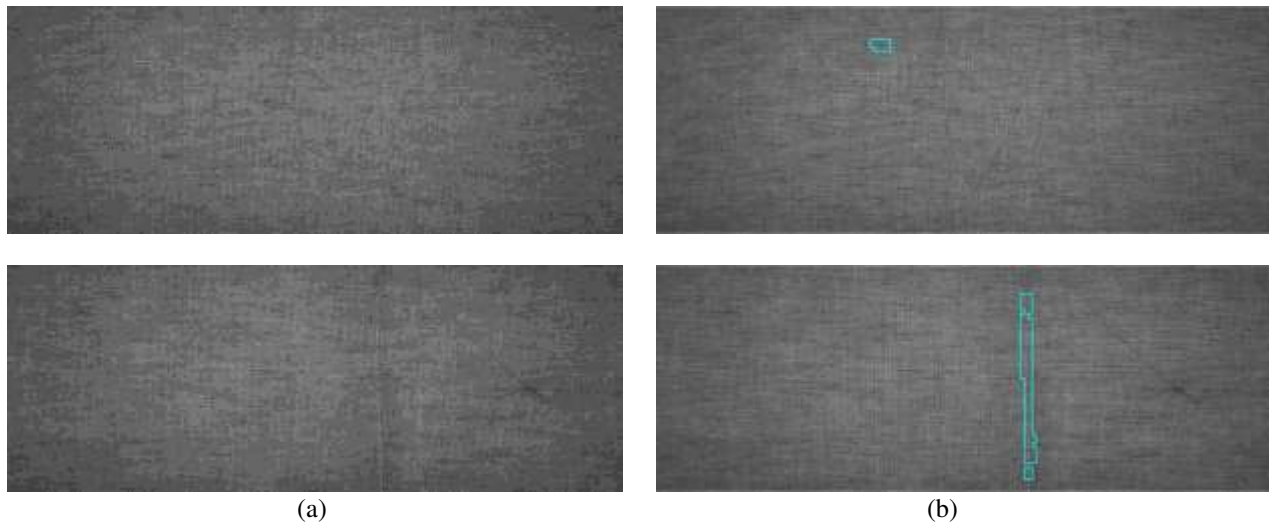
Detect example in the deployed machine. (a)Input image. (b)Inspection result.
